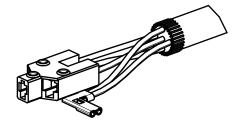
Compressor motor cable and earth for VNEX compressor series
